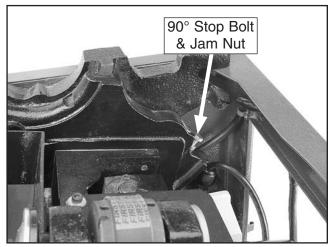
90° stop bolt and jam nut (table removed for clarity).
